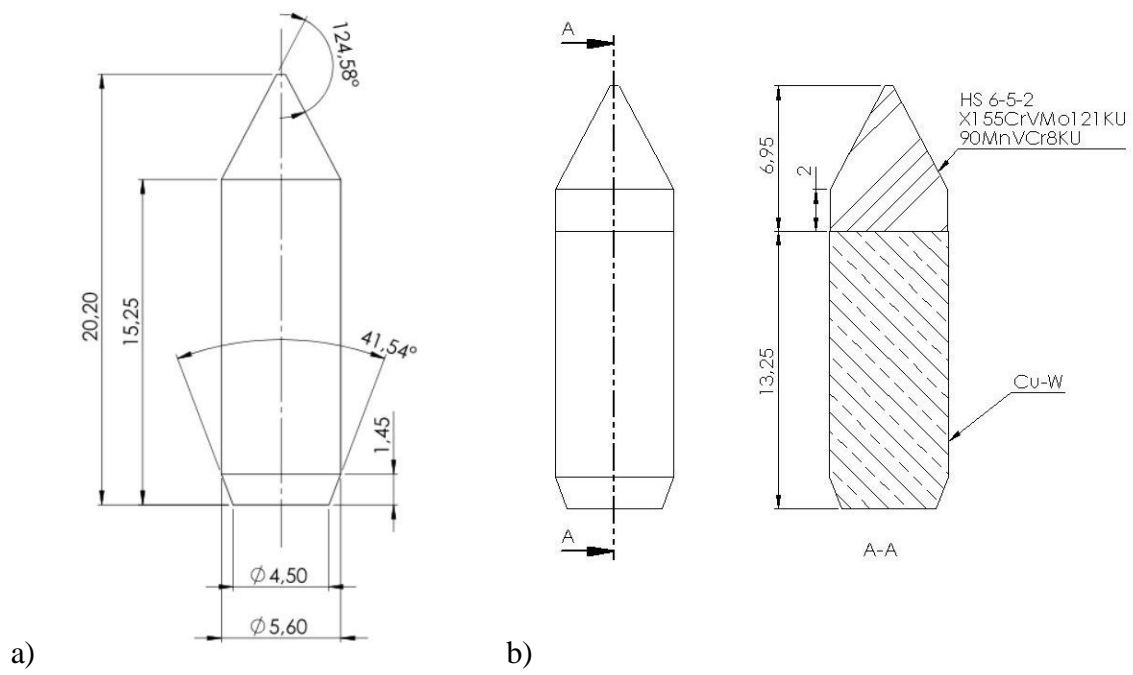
Penetrator (a) and modified penetrator with Cu-W back rod (b)
